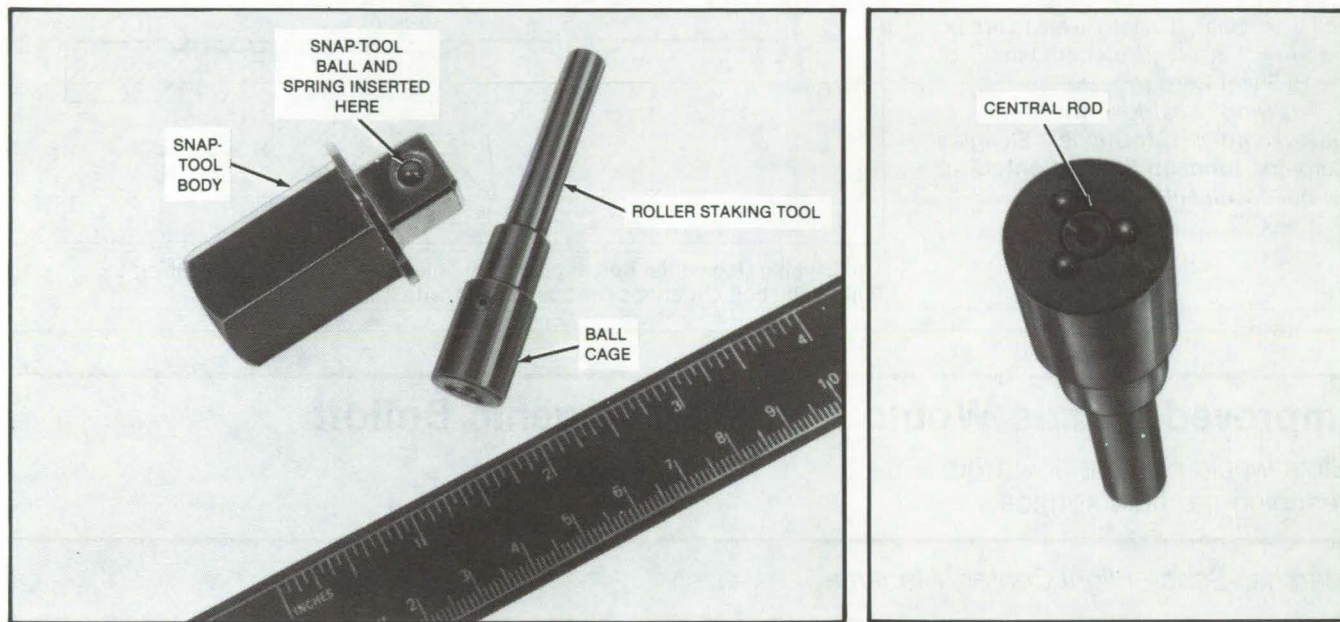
Roller Staking Tool (center and right) was used to insert the snap-tool ball, 0.187 inch (4.75 mm) in diameter, in the snap-tool body (left). The three equidistant balls in the ball cage apply rolling pressure to the body. The tip of the central rod contains a recess in a ball pilot that centers and seats the snap-tool ball. The brass cage can be removed easily so that worn cage balls can be replaced.
